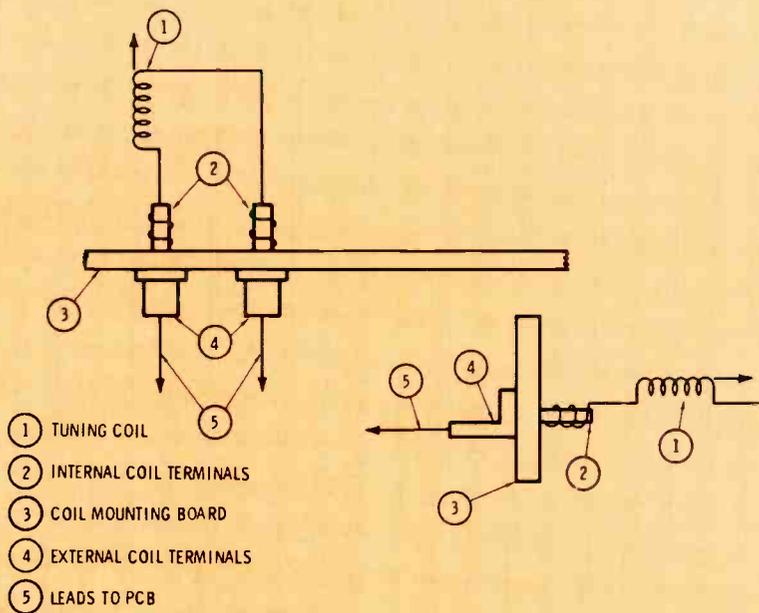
A problem that has been showing up frequently is poor solder joints at the points where the RF and oscillator coils are attached to the mounting board. Resoldering usually is the cure.
